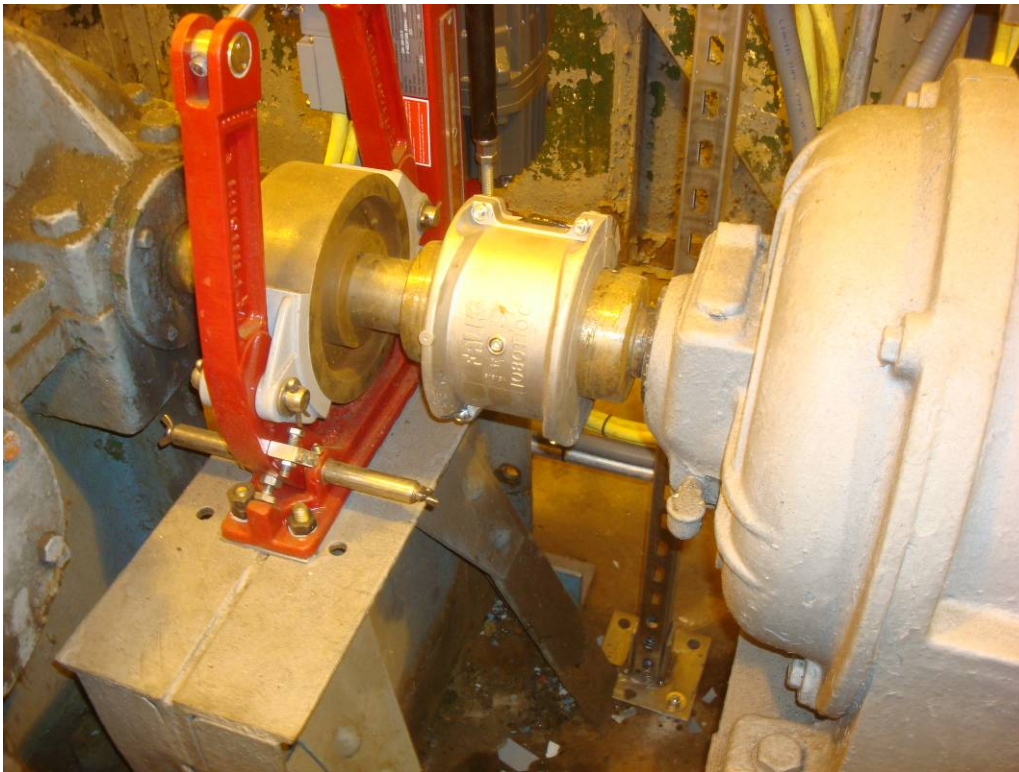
The final assembly of the machinery and motor coupler has been completed with the cover of the coupler installed.
